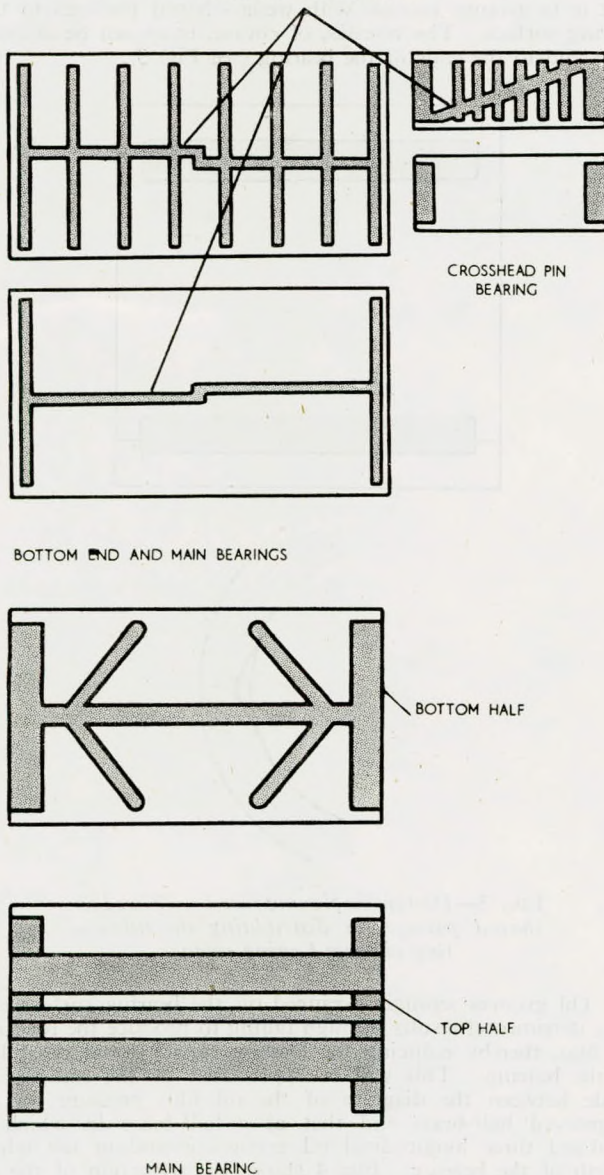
Developed bearing surfaces showing effective designs for main, crankpin and crosshead pin bearings
